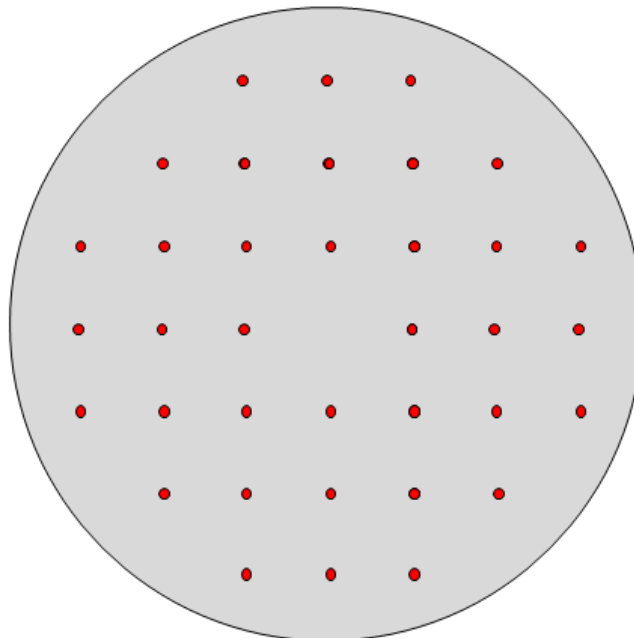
The hole pattern for the air reactor distributor plate. Each hole is 1.59 mm (0.0625") in diameter.
